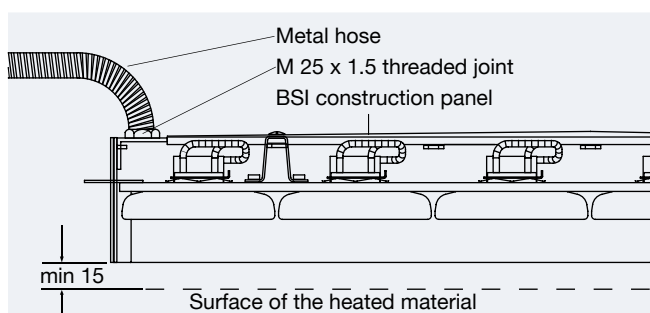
Arrangement of the connection unit for establishing the mains connection
